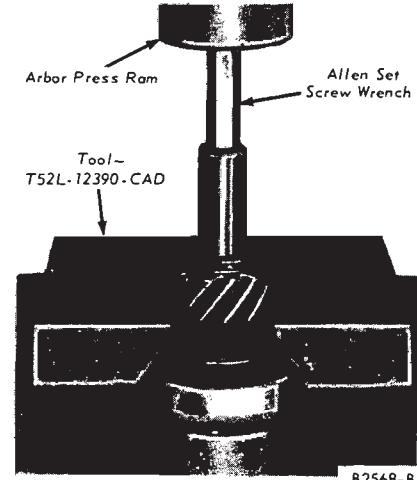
Removing Shaft and Gear 6-Cylinder Engine
